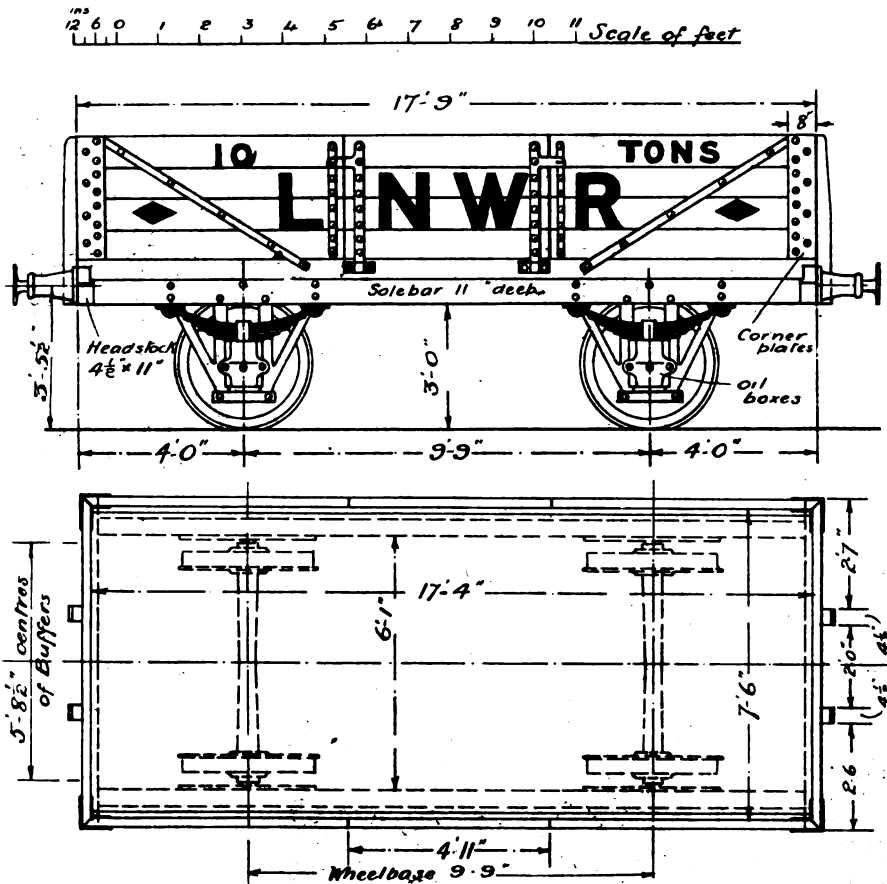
SIDE ELEVATION AND PLAN OF L.N.W.R. 10-TON GOODS TRUCK.
